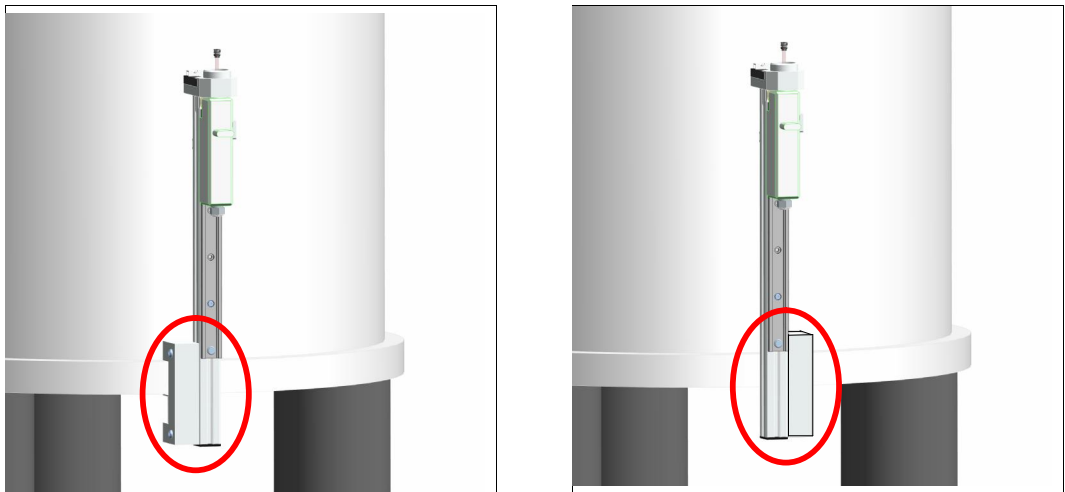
Mounting Clamp on both sides of the HAND SLIDER UNIT
